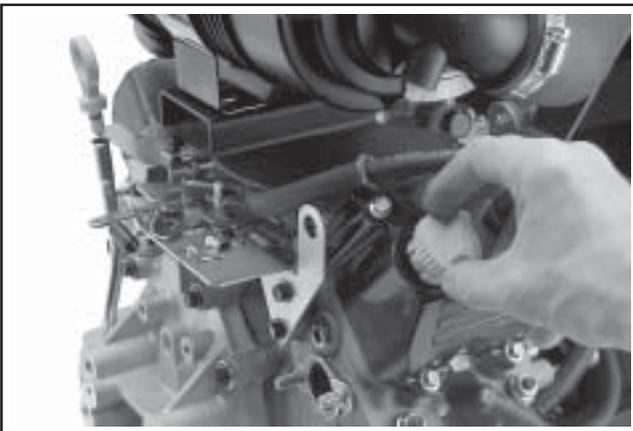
Installing Dipstick and Oil Fill Cap.
